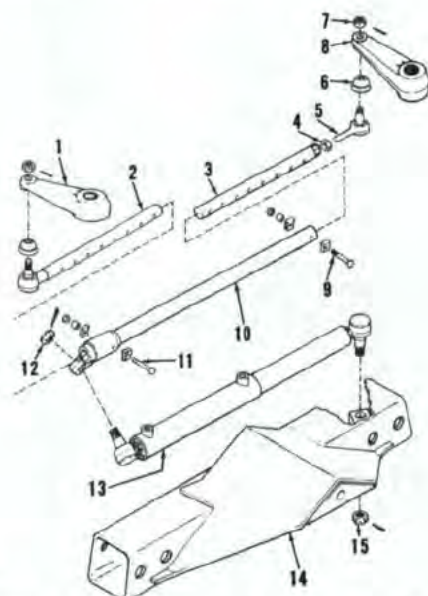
Exploded view of steering tie rod, cylinder, and arms typical of all models. (Standard wheel base axle shown.)
